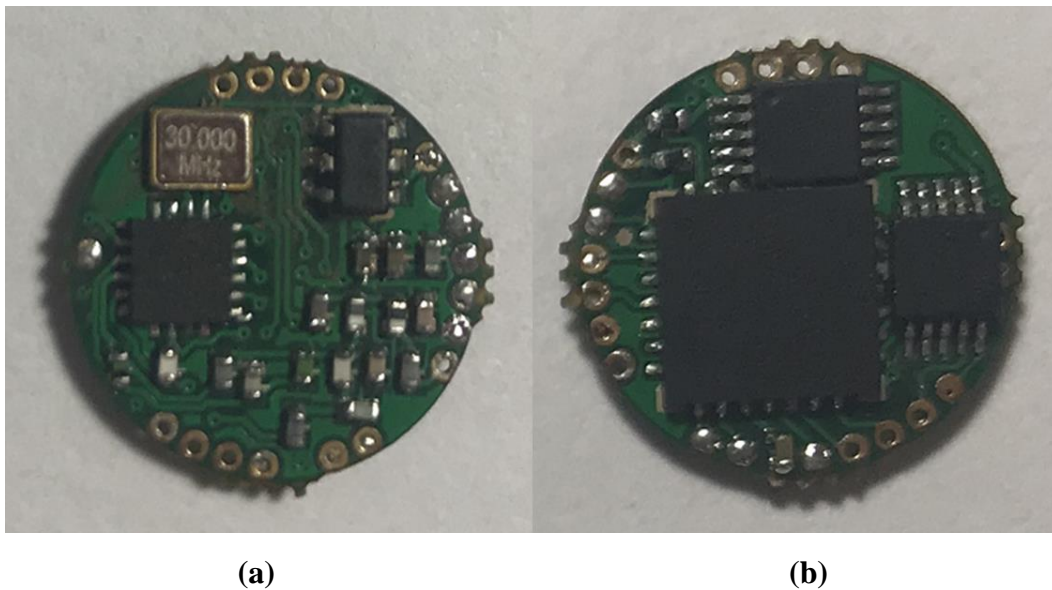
Completed PCB Board of the Internal Wireless Communication Module
